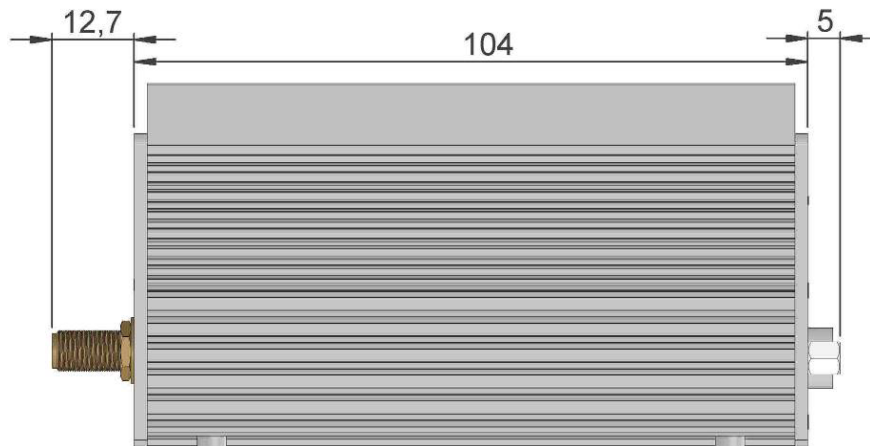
MBox-R-E39, Dimensions (mm), Side View
